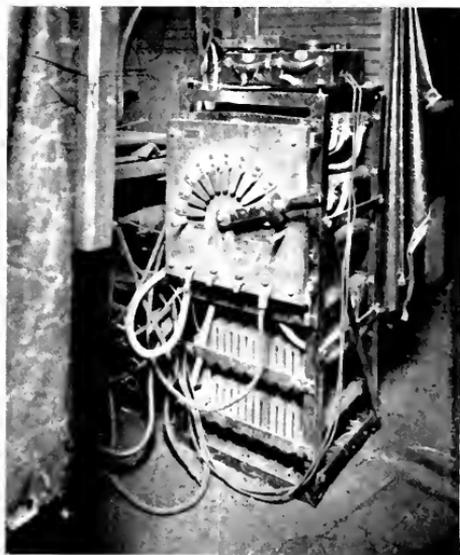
Direct-current or Alternating-current Resistance Welding Equipment
